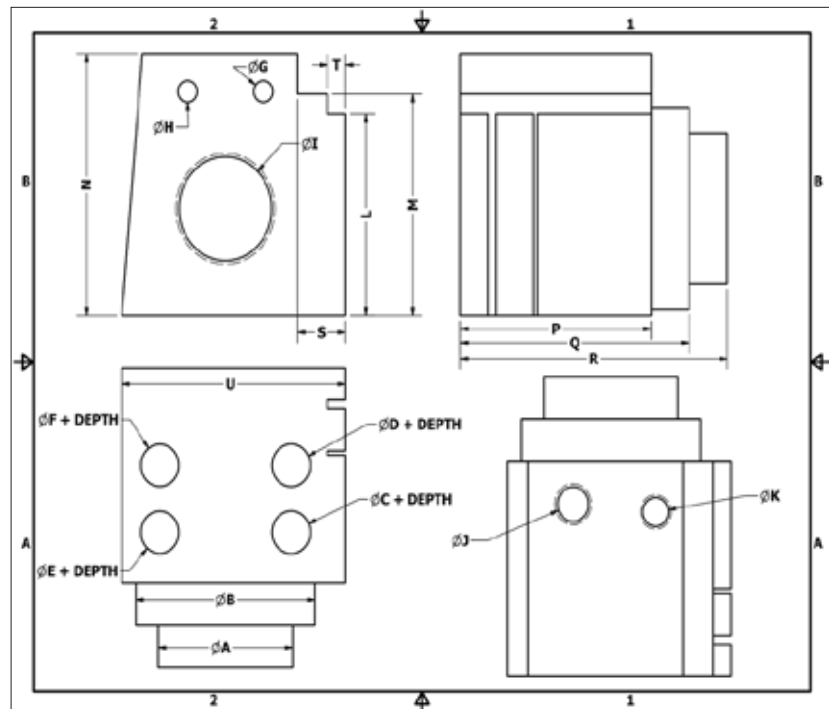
A similar drawing of the CMM artifact with letters to designate the dimensions to be measured by the participants.
